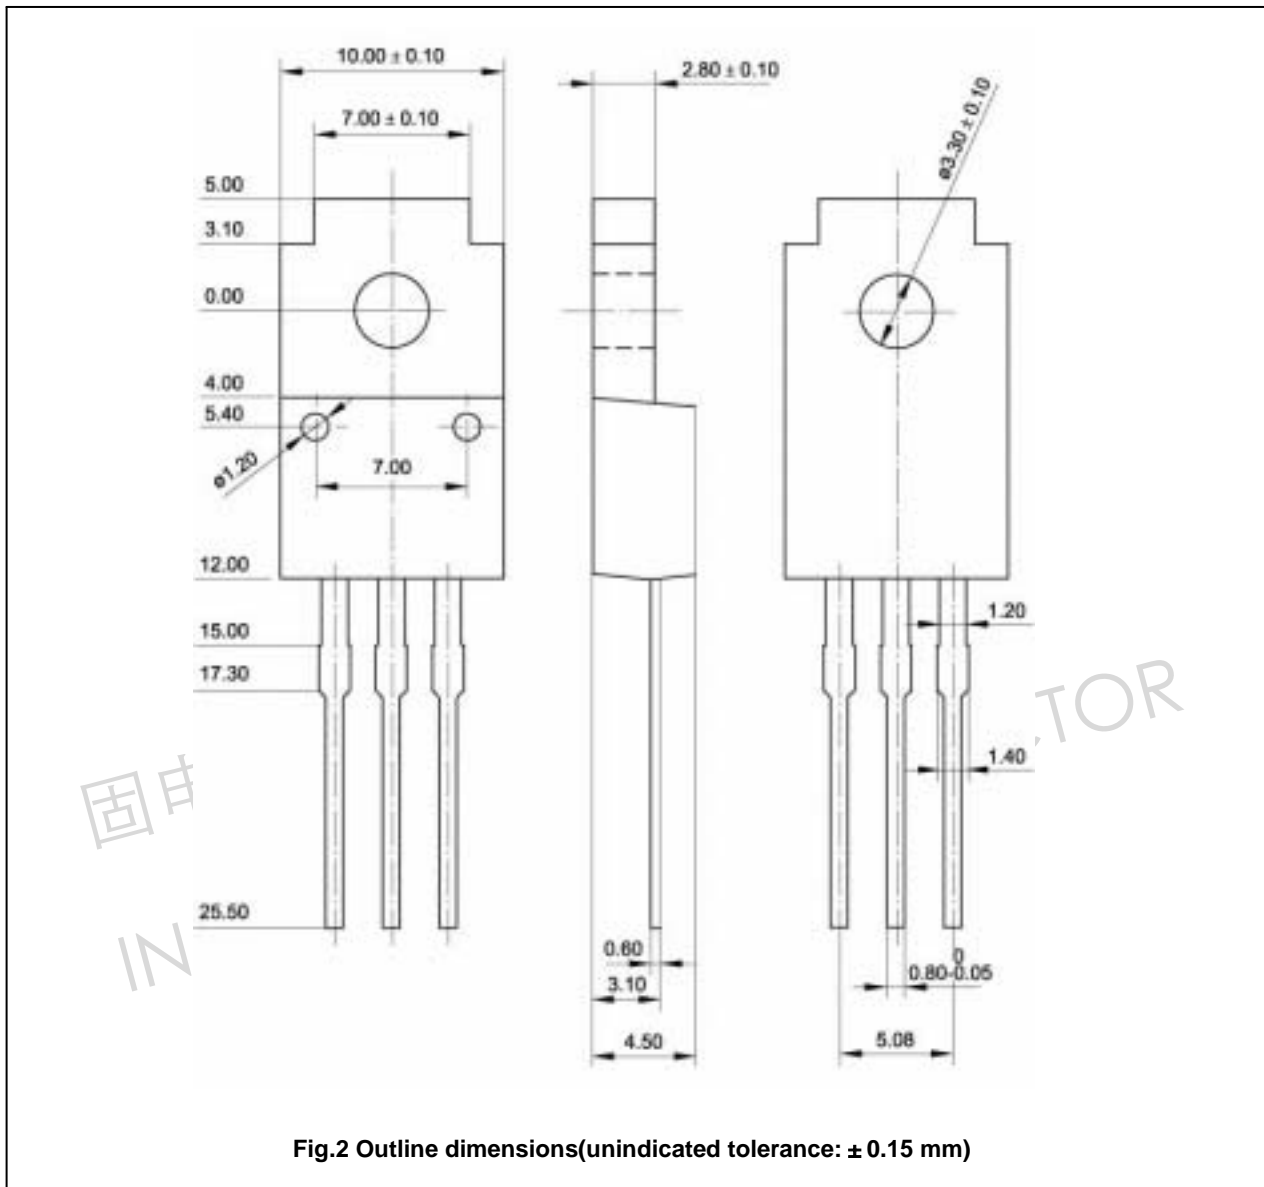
Outline dimensions(unindicated tolerance: ± 0.15 mm)
